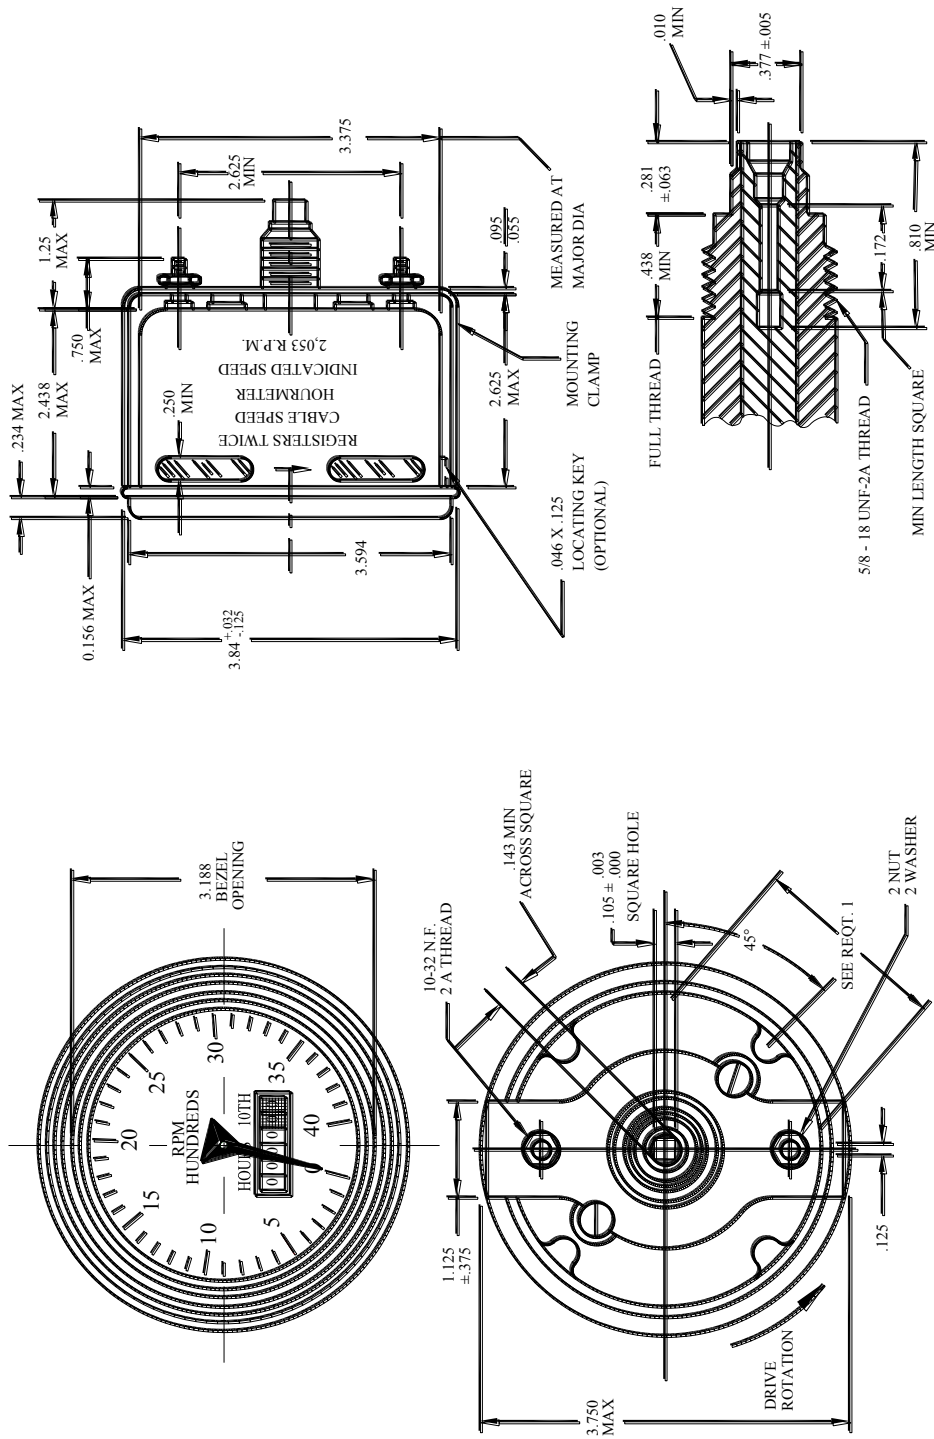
Tachometer, fixed mounting (4,000 rpm).
